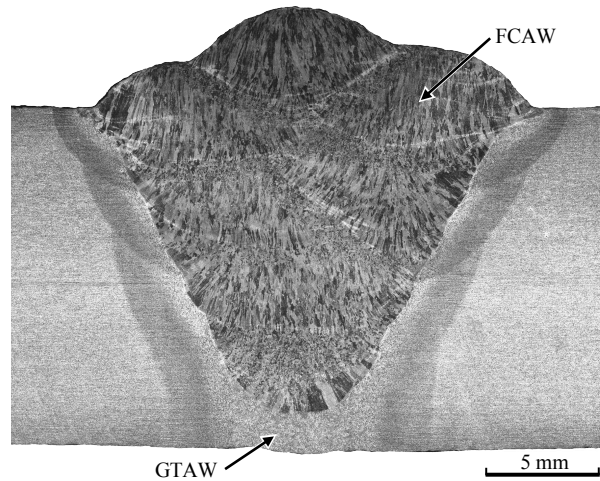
FCAW filler and cap welded X65 pipes with GTAW root weld pass: section of weld after 2 % nital etching.
